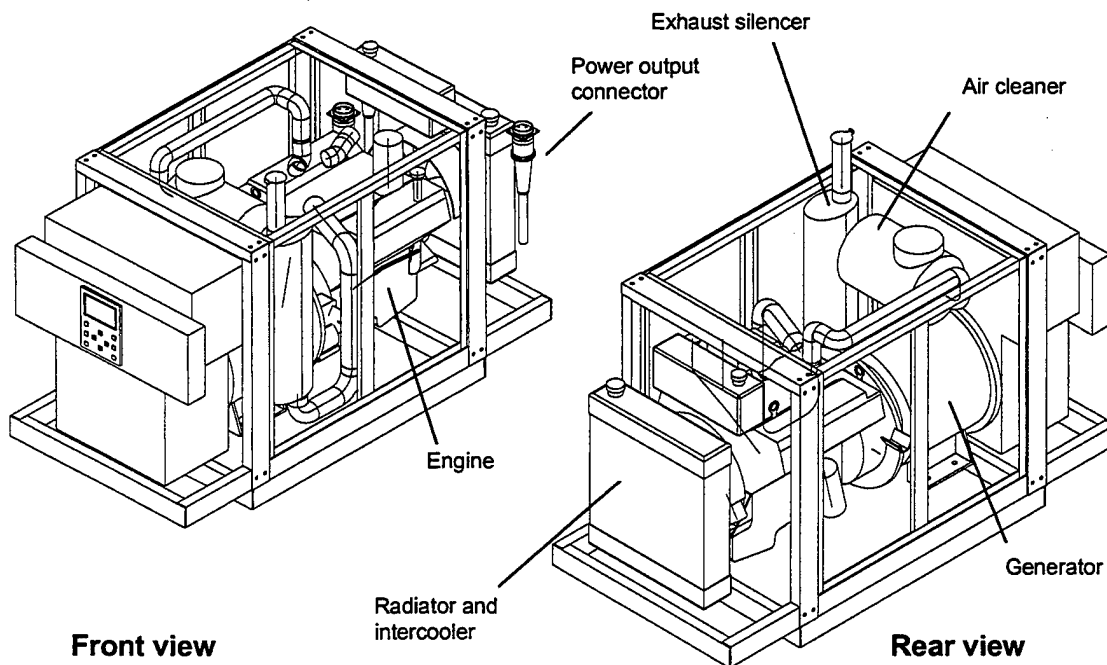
Diesel Generator Module Front and Rear—Internal View
